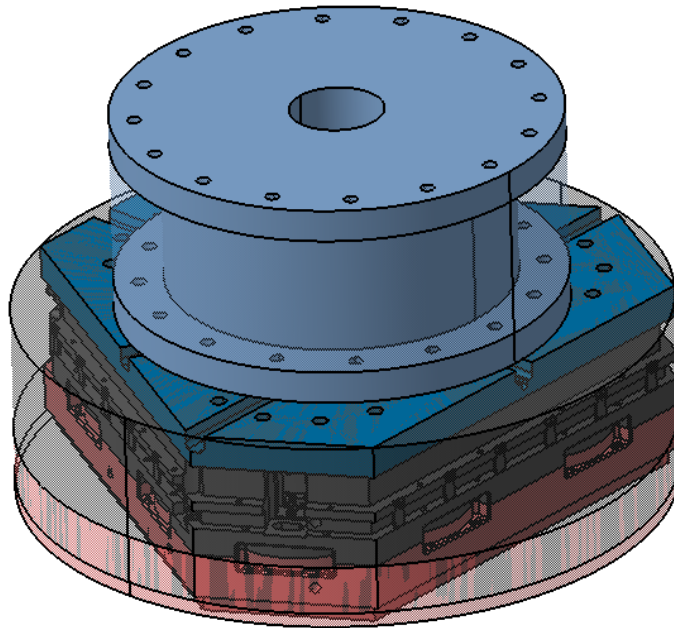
Example of Force and Torque transducer assembled to the coupled Master and Tool side Tool Changer via an interface plate fitting within the related required space constraints (automatic connectors and rescue interfaces are not shown)
